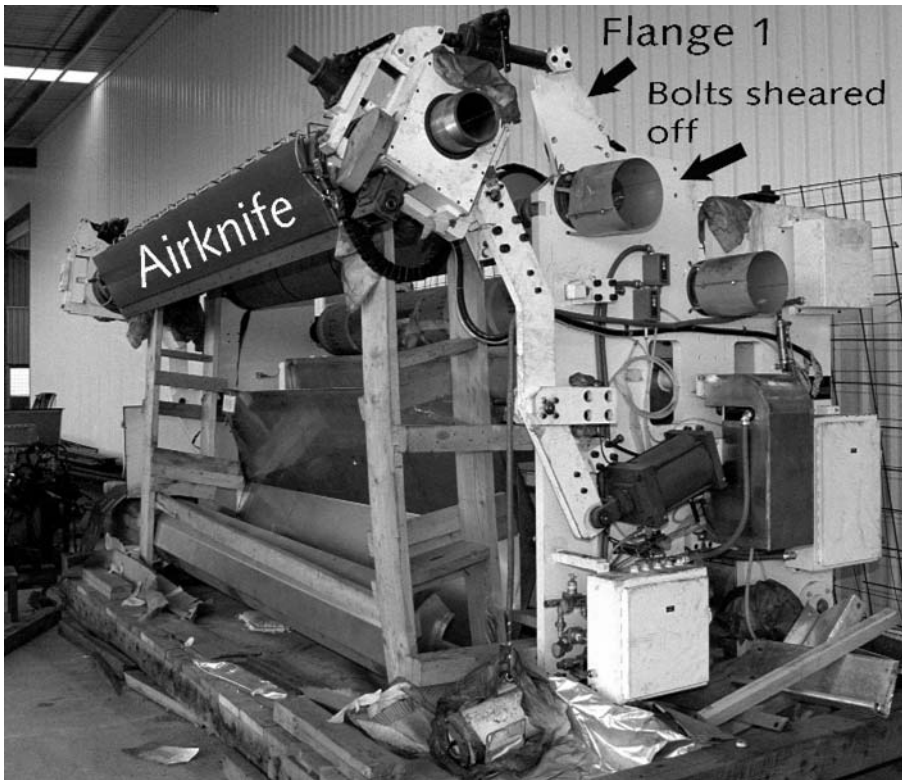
General view of the partially unpacked airknife machine in its damaged packaging
